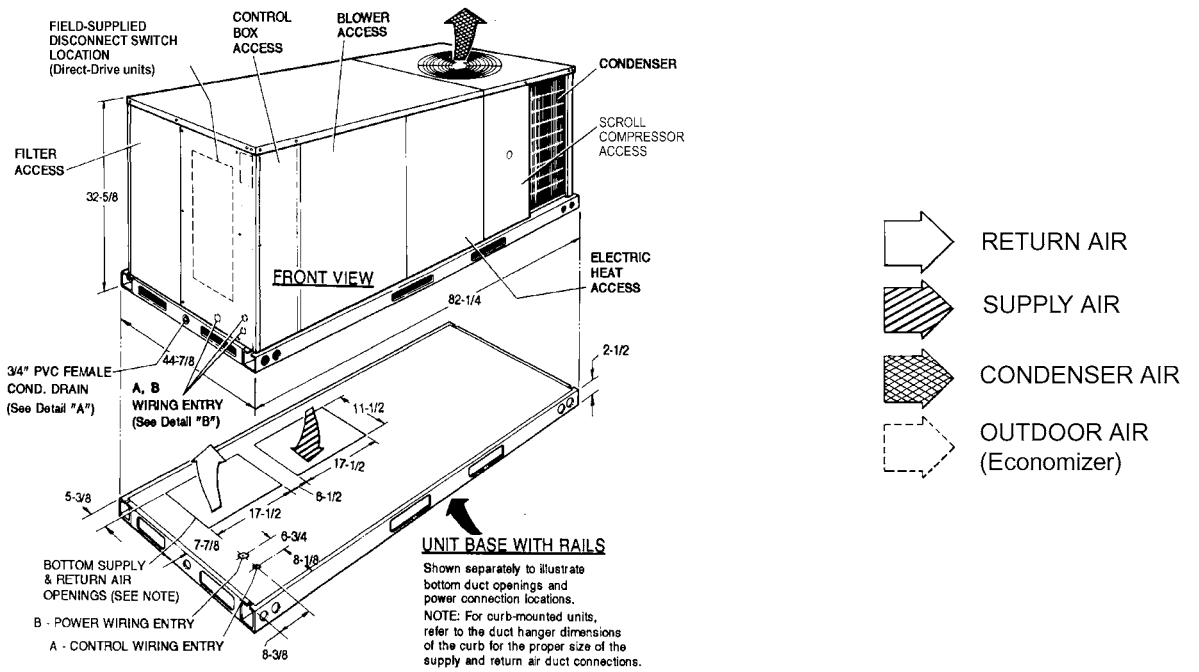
UNIT DIMENSIONS (3 - 5 TON HEAT PUMP) FRONT VIEW
